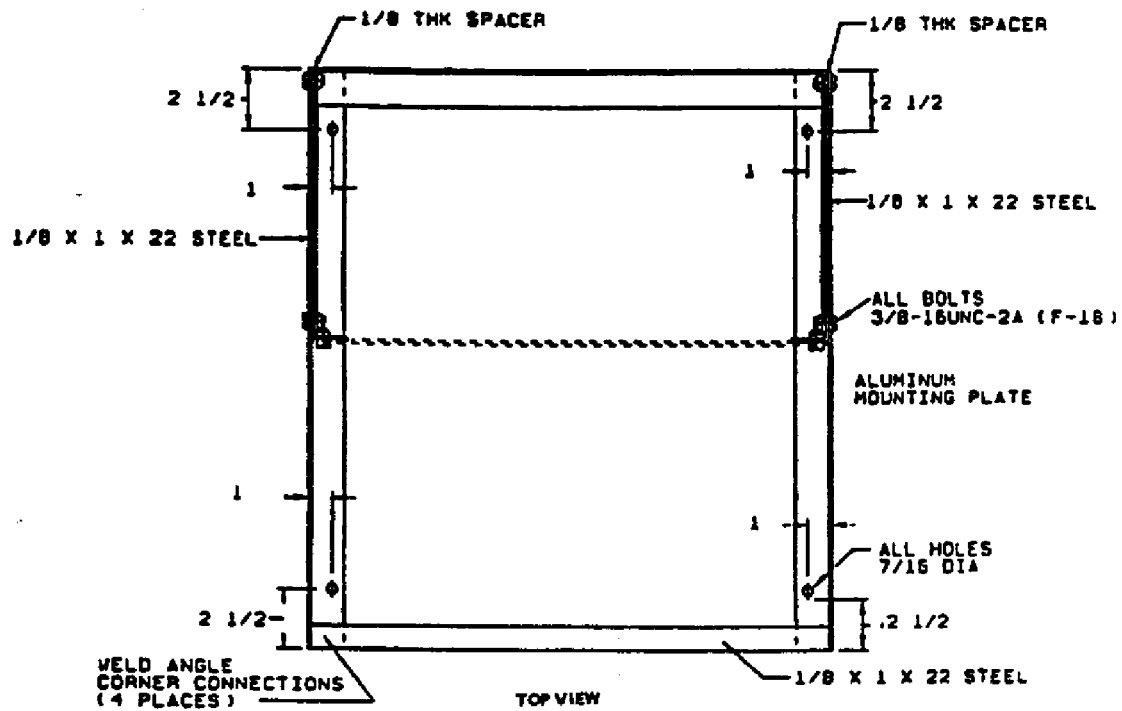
Automatic Combustion Control Calibration Panel Drawing (Sheet 6 of 13)
